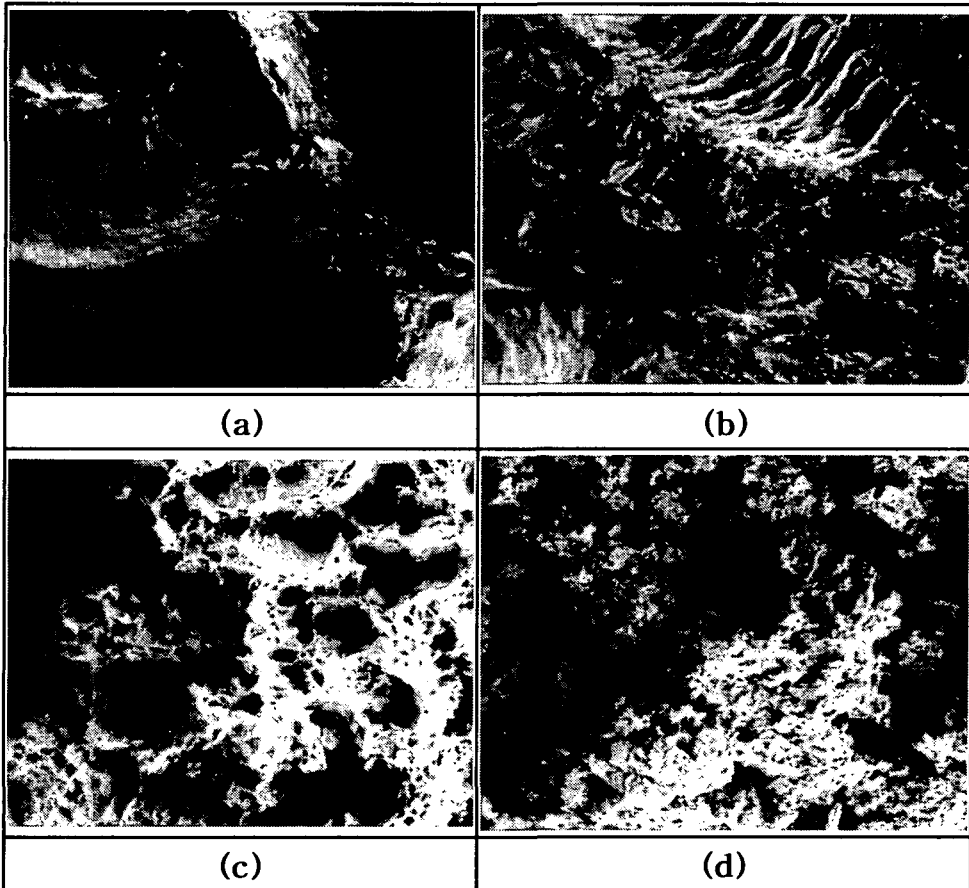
SEM fractographs of tensile fracture surface tested at 800°C ; ($\times 100$)
